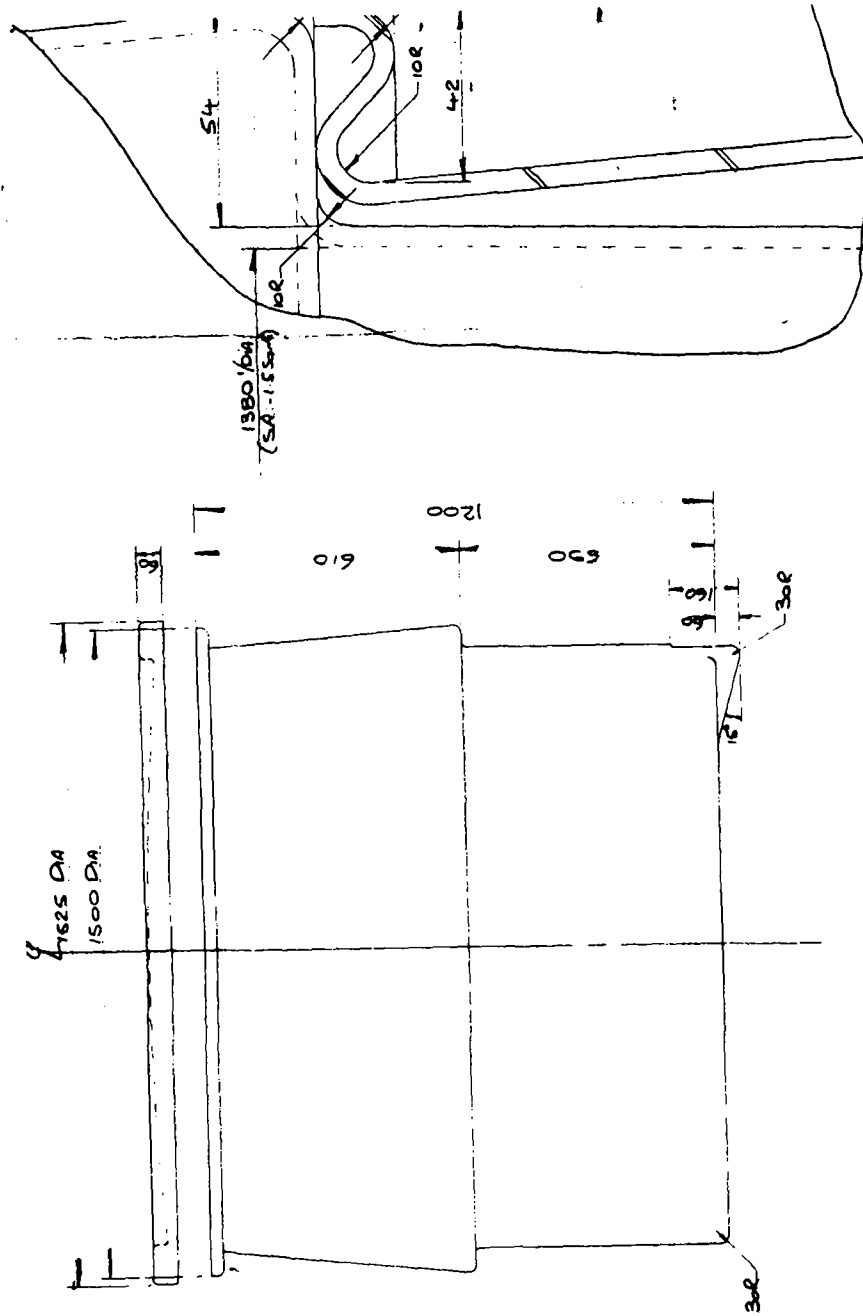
Engineering drawing of WCB slow sand filter module tank (MDPE construction).
